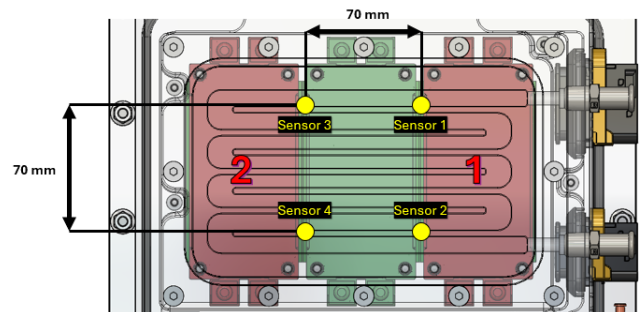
Heat sink assembly showing the coolant circulation channel, IGBT modules, and temperature sensor locations.
